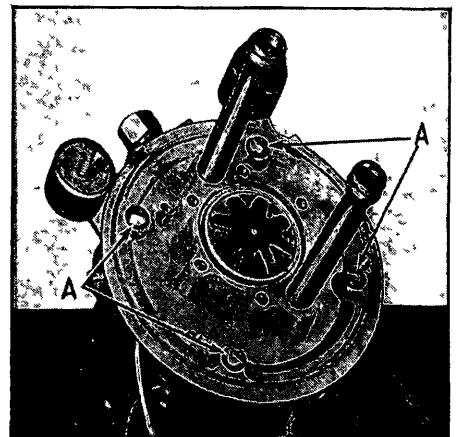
Sh wing four screws "A" which attach pump housing using trim on Dura pump
